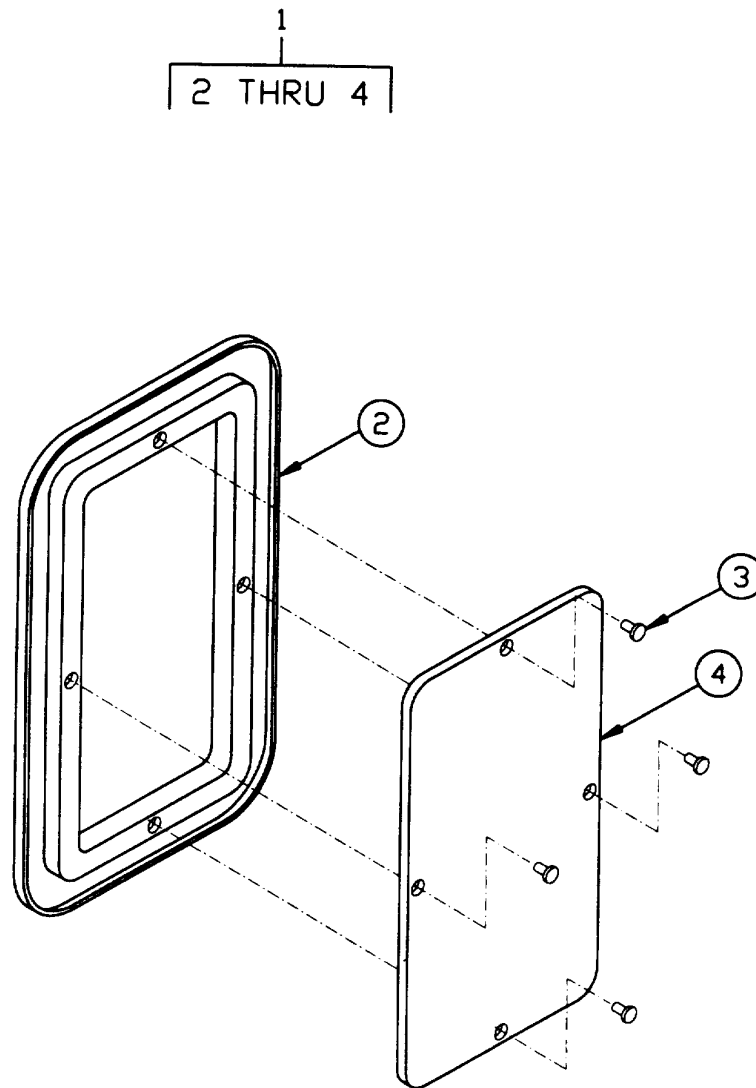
PANEL ASSEMBLY, ESCAPE HATCH
